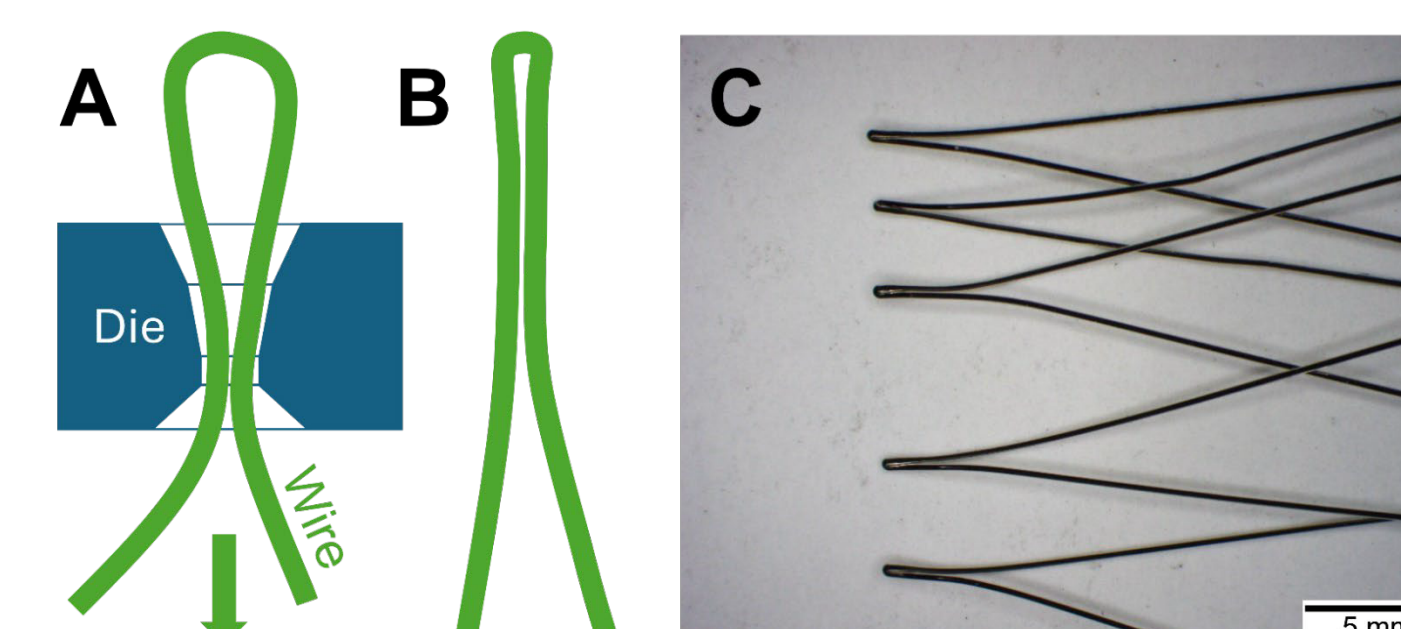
Sharp bend forming test performed by drawing a looped wire through a die 2× the wire diameter (A) to create a dead sharp bend (B), which Paliney 35 HT survived (C).
